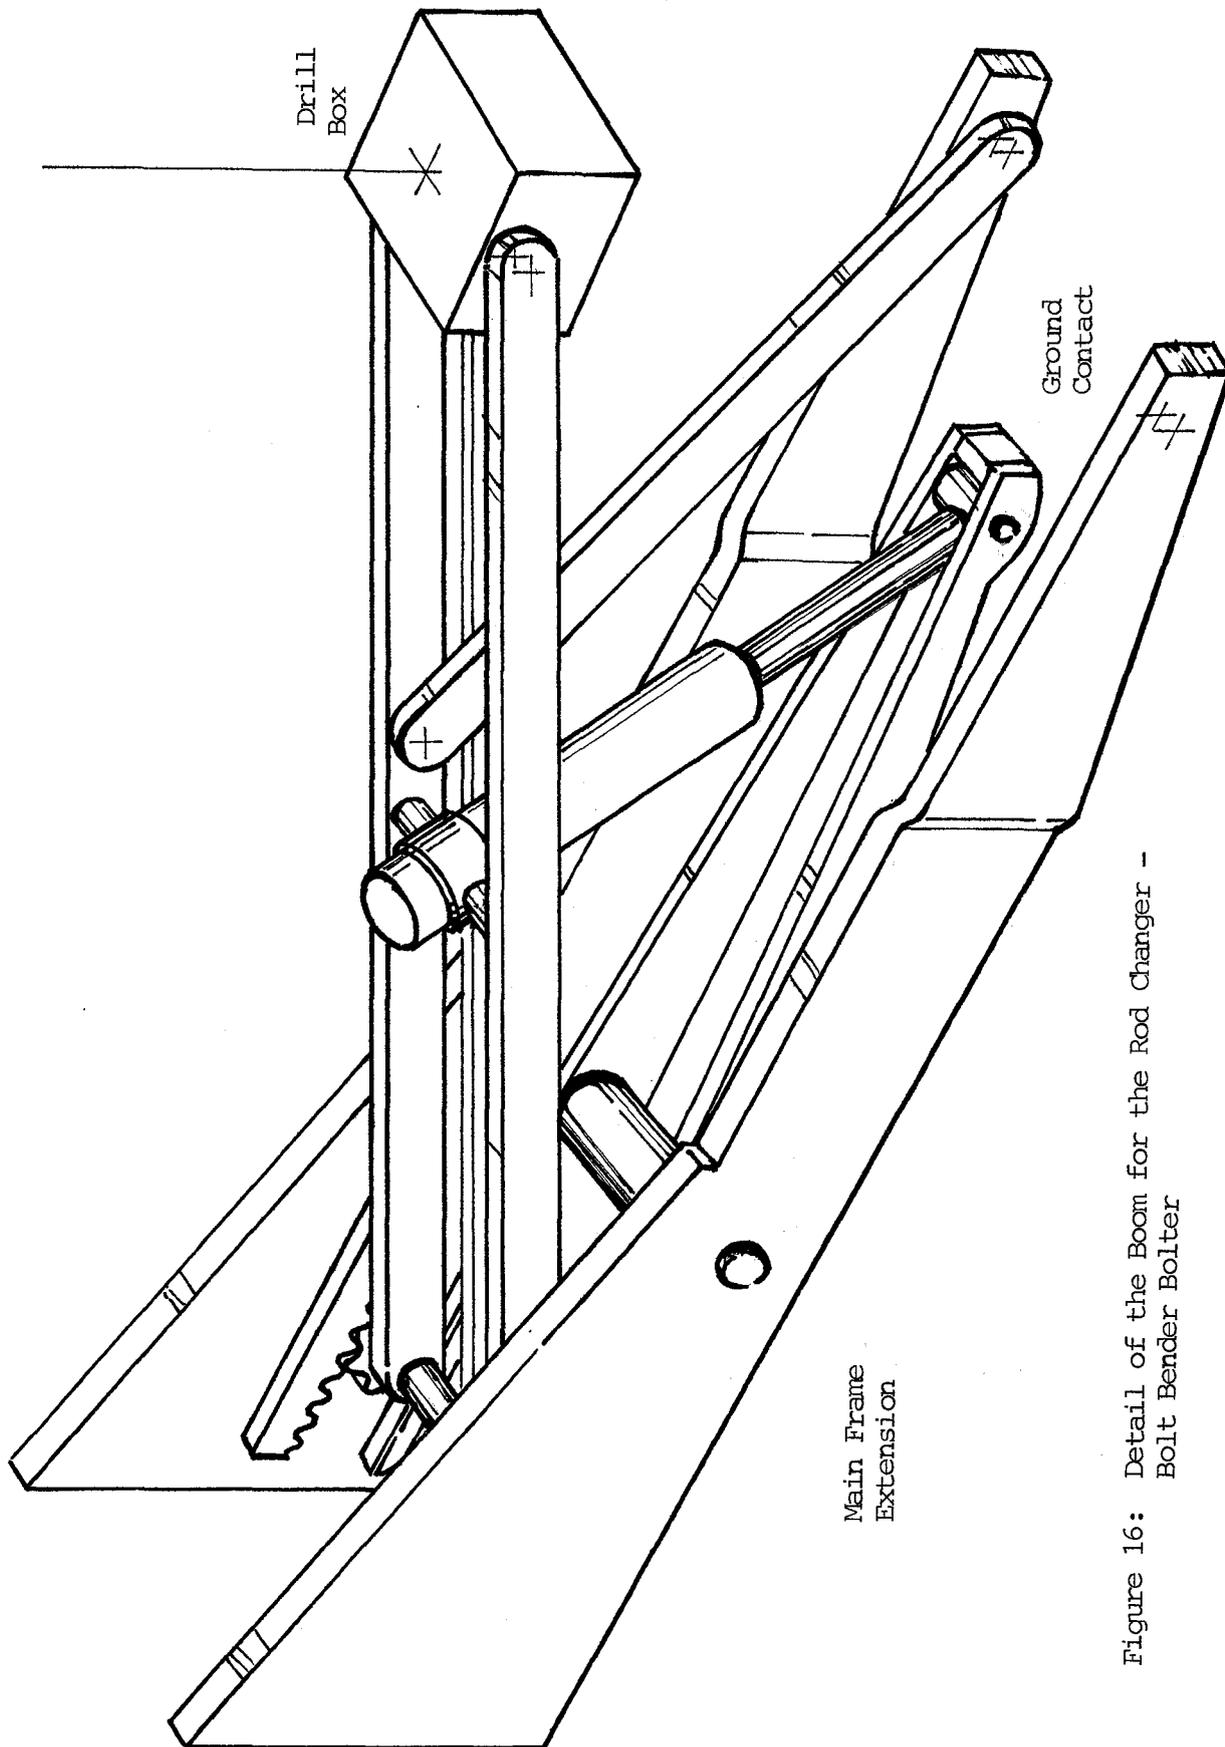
Detail of the Boom for the Rod Changer - Bolt Bender Bolter
